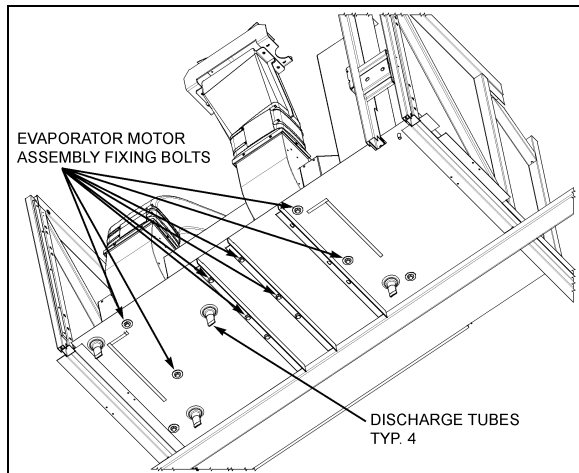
EVAPORATOR MOTOR ASSY FIXING BOLTS 22315
